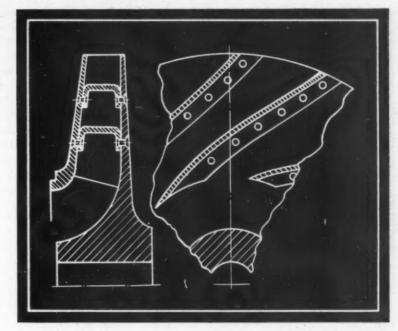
Above — Typical fully shrouded centrifugal impeller construction for large-size industrial applications
